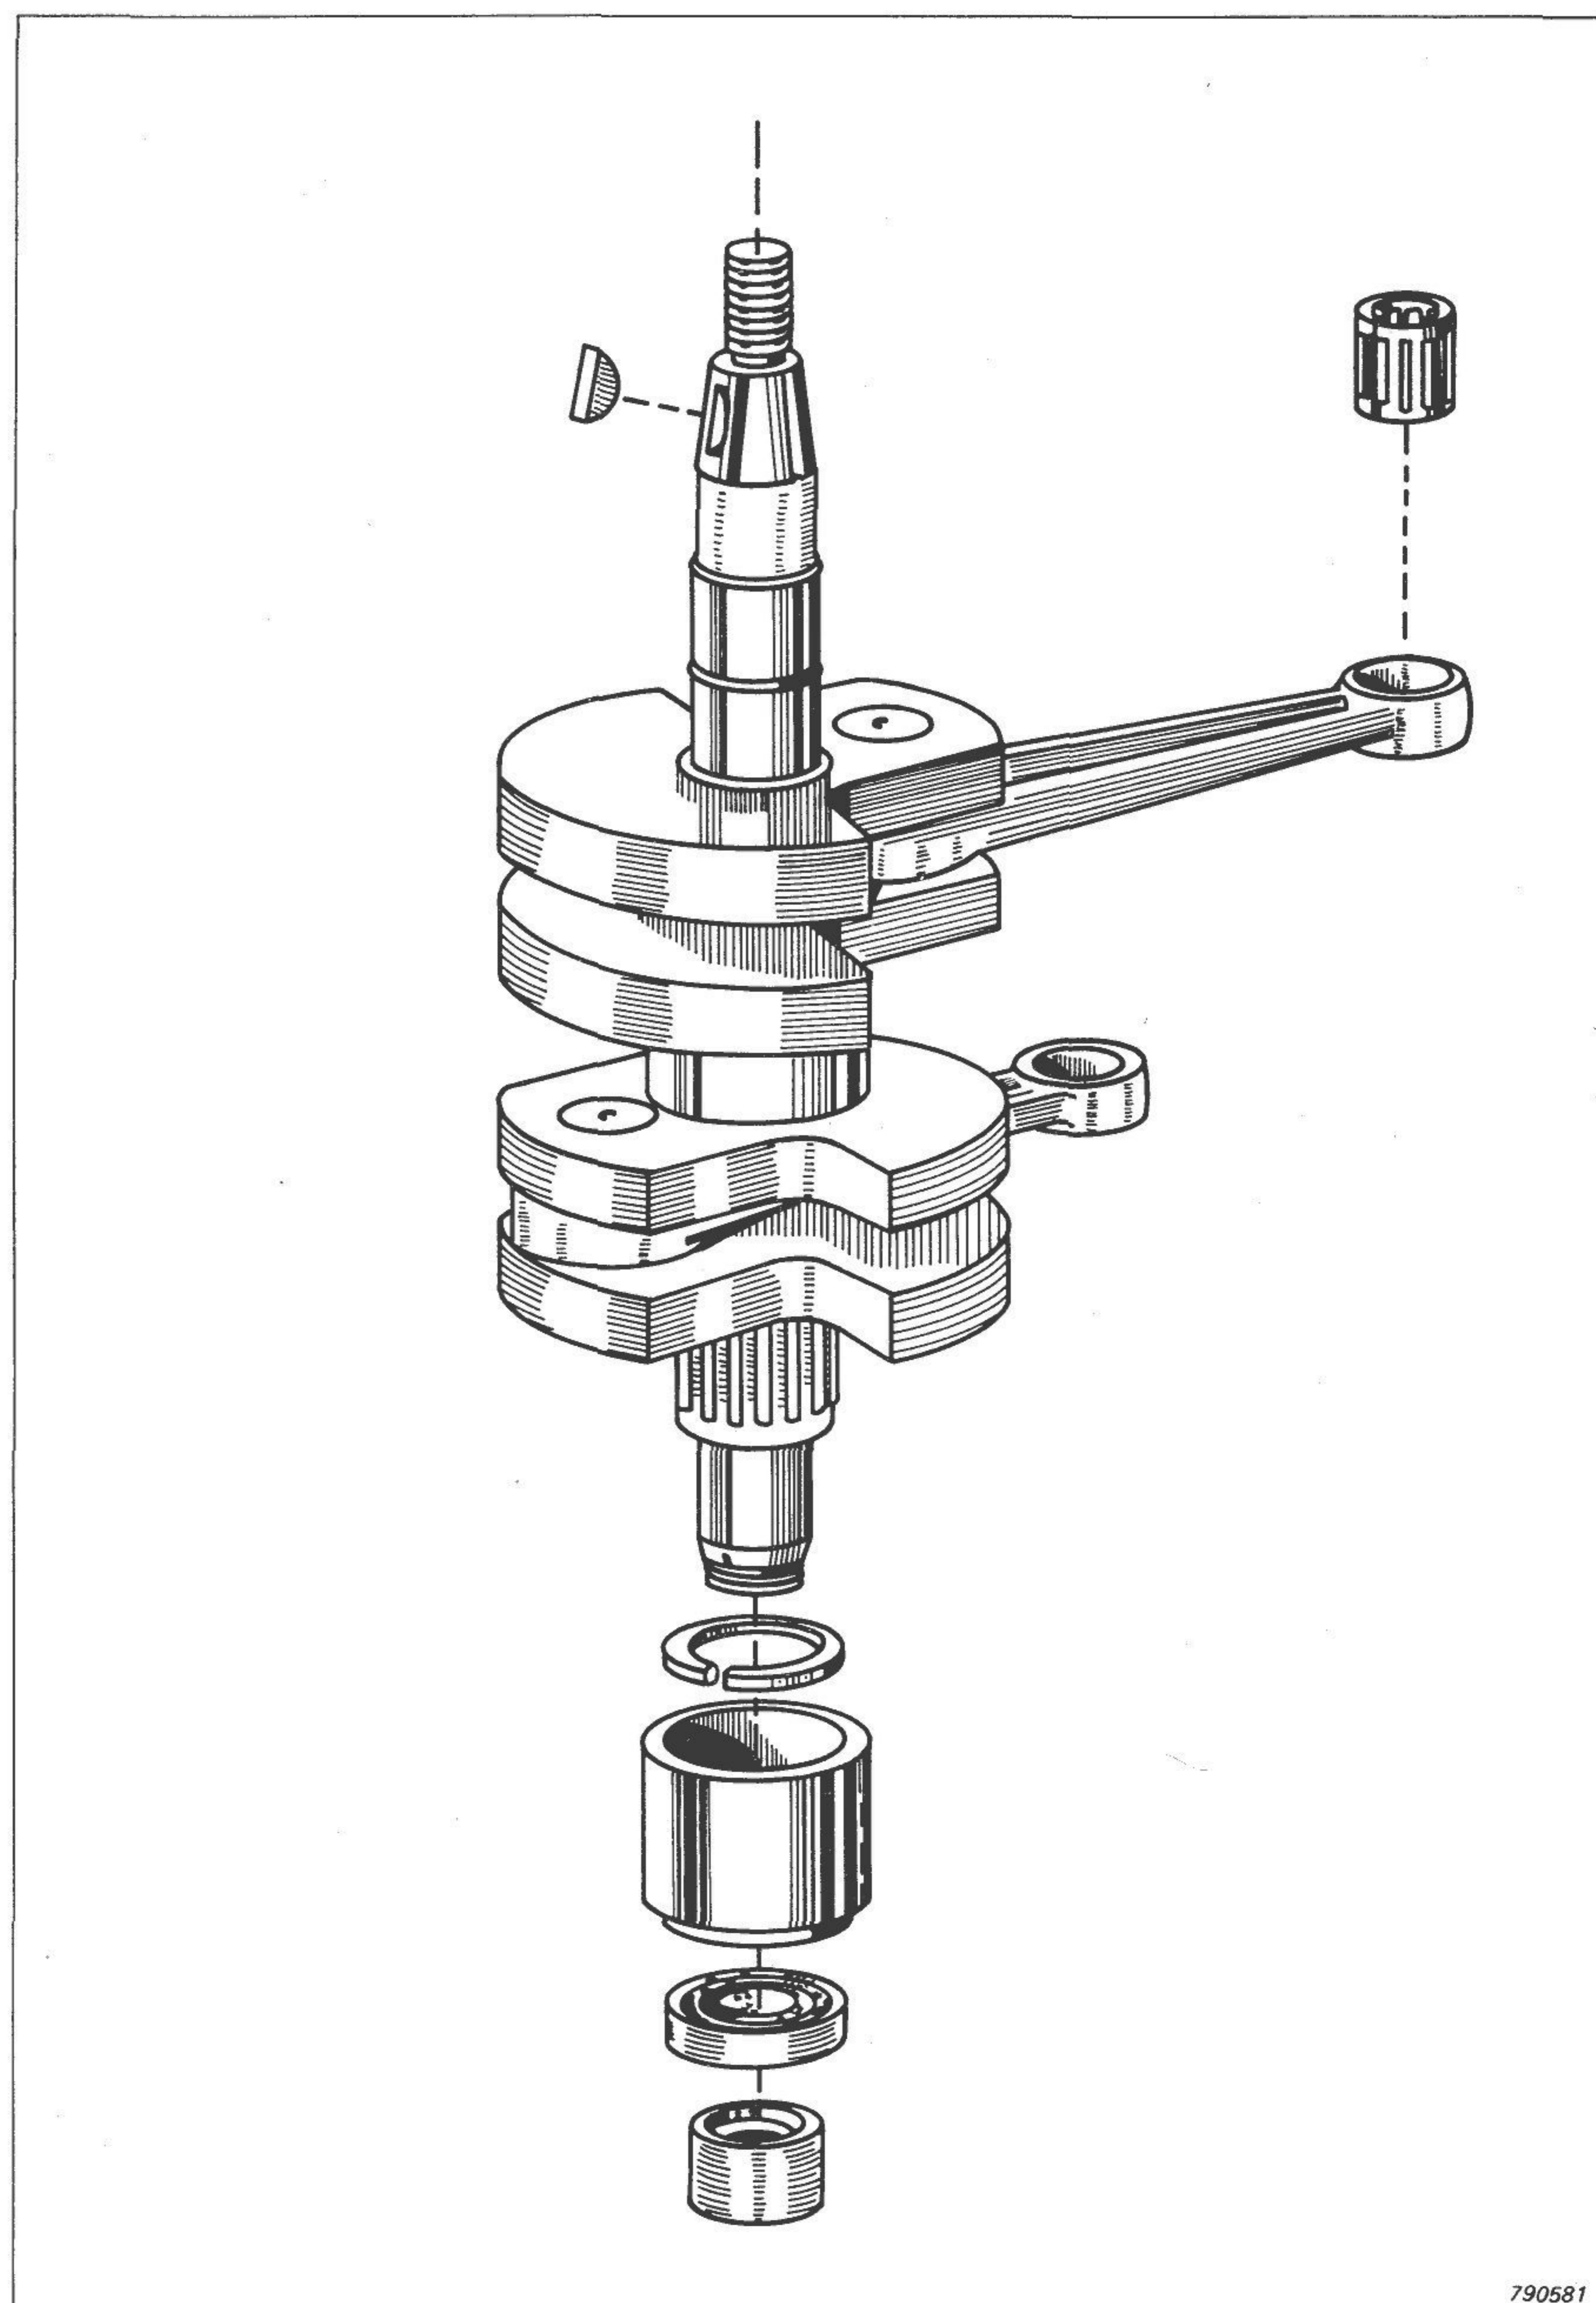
Exploded diagram showing a twin-cylinder crankshaft assembly
